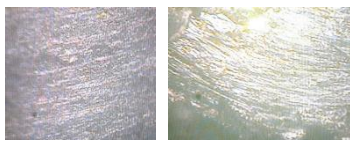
Surface appearance of weld zone obtained using pin less MS tool.
